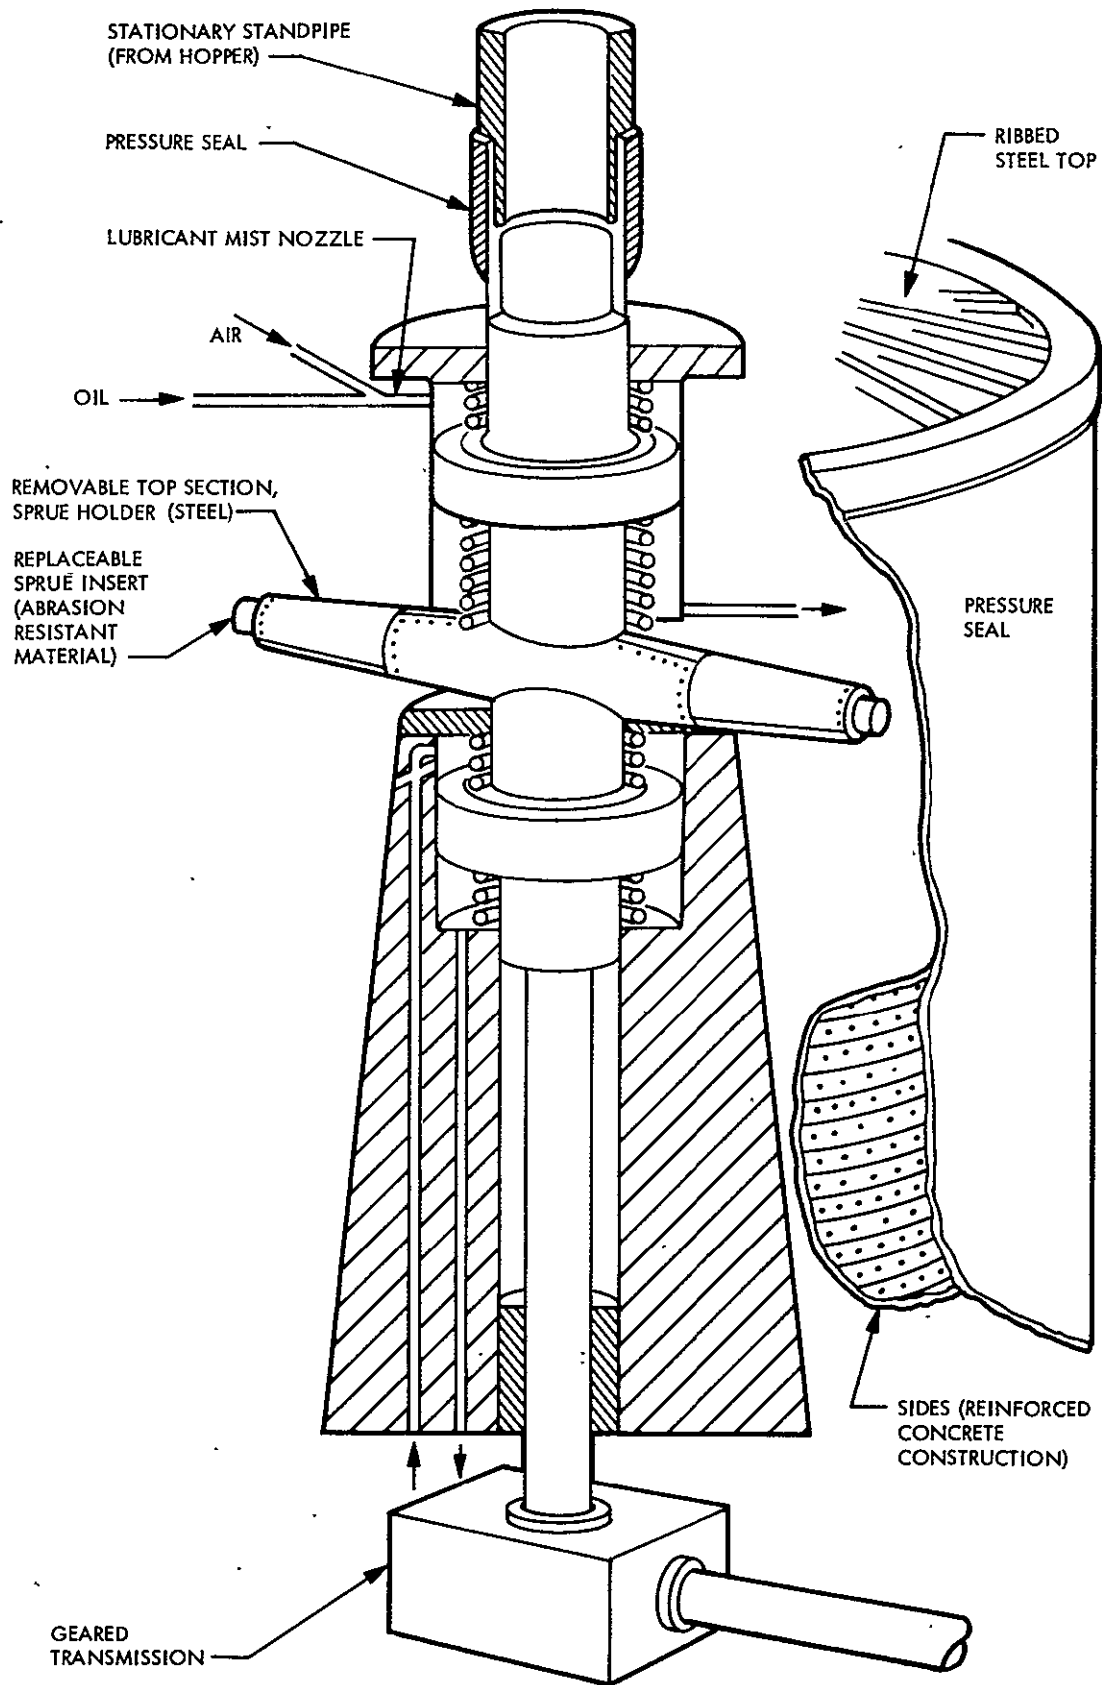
Centrifugal Coal Feeder (Two-Sprue Design)
